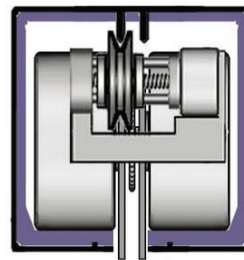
GUIDEWHEEL IN FULL CONTACT WITH GUIDE
